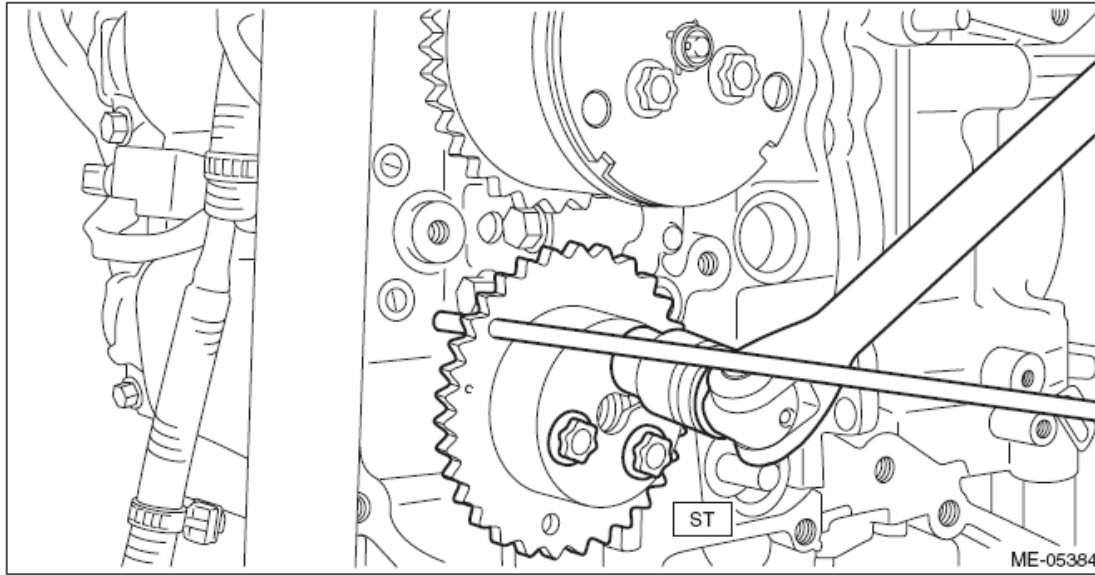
Removing Exhaust Cam Sprocket Bolts
